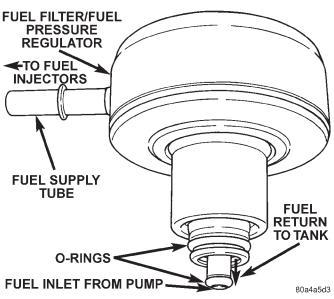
Fuel Filter/Fuel Pressure Regulator O-Rings
